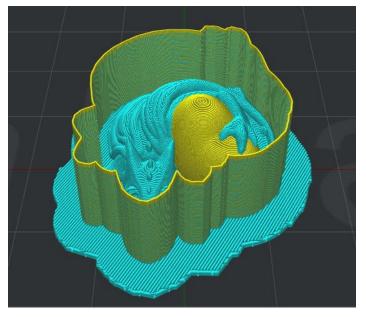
Set "Wipe Wall Angle" to be 0.
